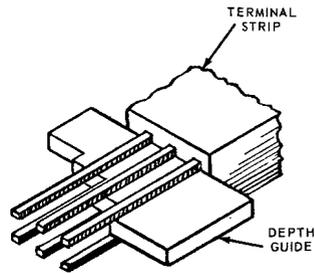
Method of Using Depth Guide for Soldered Connections on Terminal Strips.
